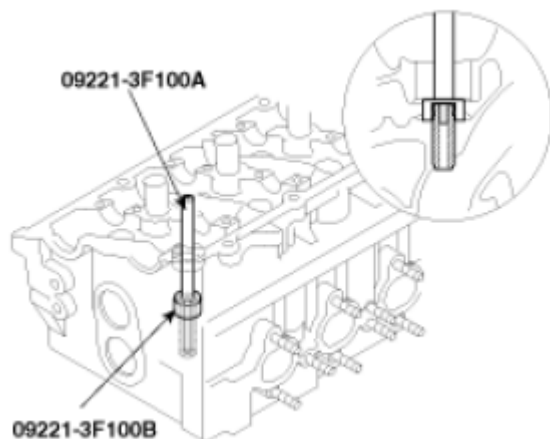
Inserting Valve Guide In Upside Of Cylinder Head Assembly
